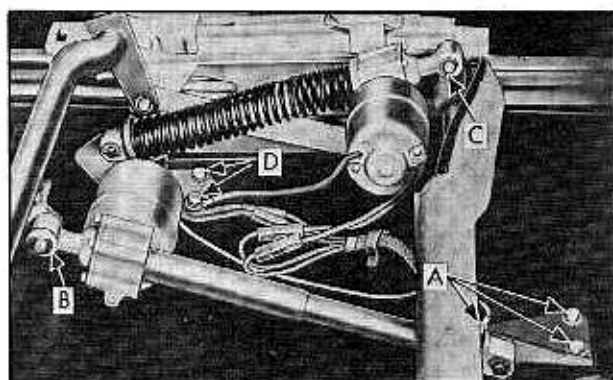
Horizontal Electric Regulator Removal (Coupes)
